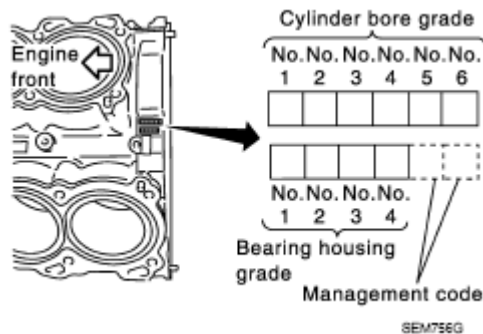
Identifying Bearing Housing Grade On Rear Left Side Of Cylinder Block
